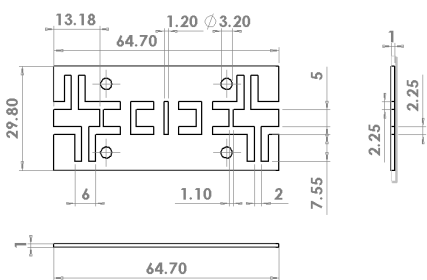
Technical drawing for layer 3 of the coaxial Chebyshev filter (dimensions in millimeters).
